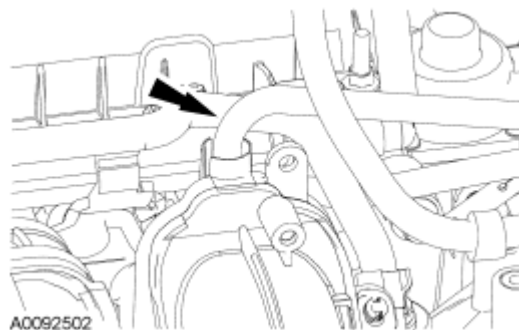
Locating Secondary Air Injection Vacuum Supply Hose
